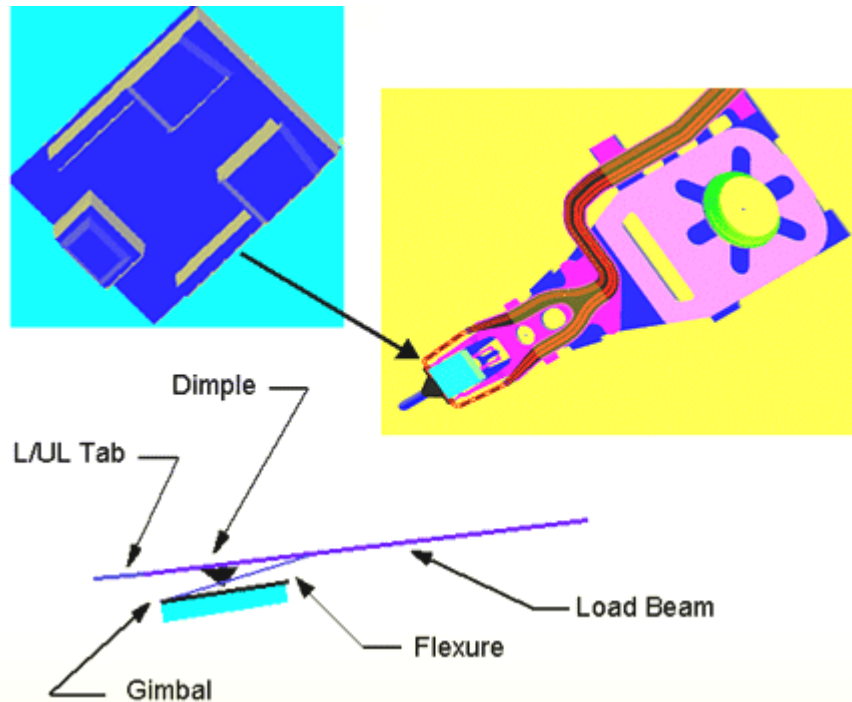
AIR BEARING SLIDER AND SUSPENSION [31]
